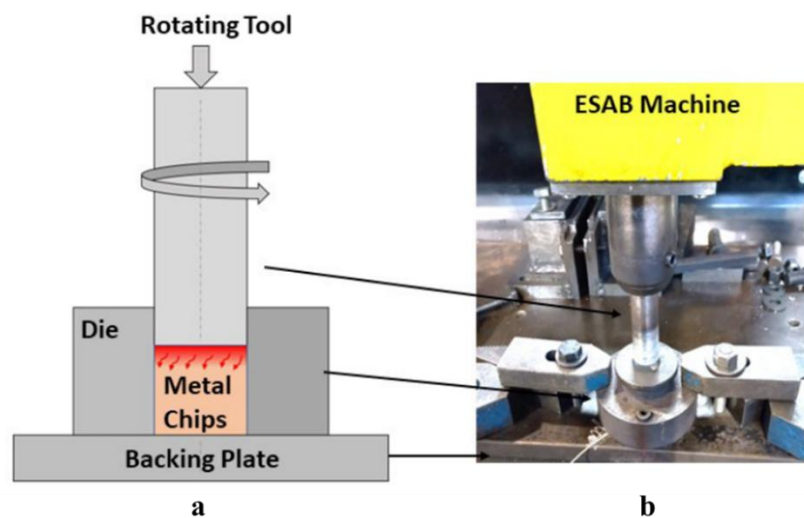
(a) FSC process sketch and (b) ESAB machine setup [40].
